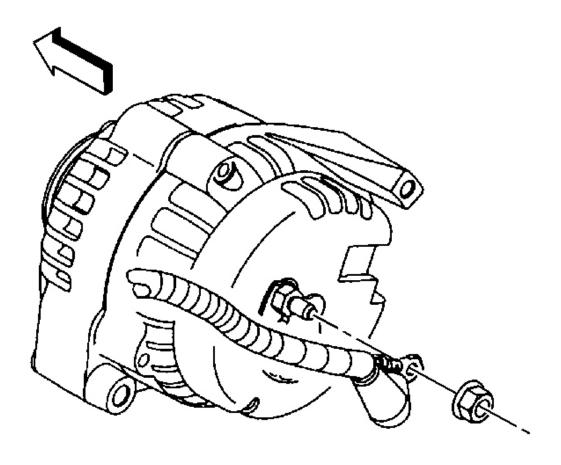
View Of Generator Cable & Nut Courtesy of GENERAL MOTORS CORP.
